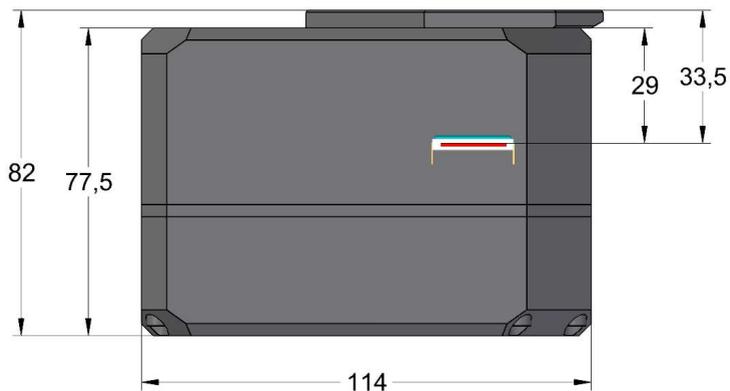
G2 camera head with Internal Filter Wheel side view dimensions
